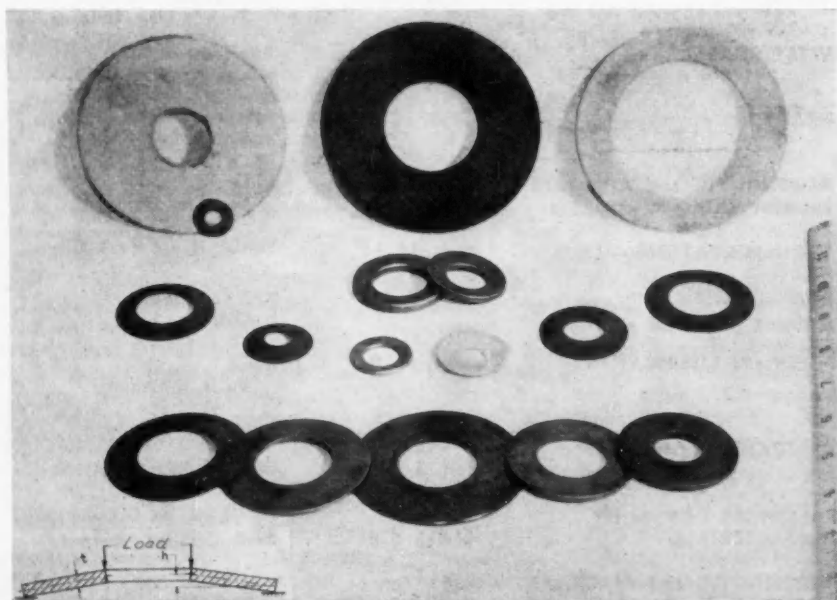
Coned disk springs, several of which are shown here, have a cross-section like the one in the lower left hand corner
